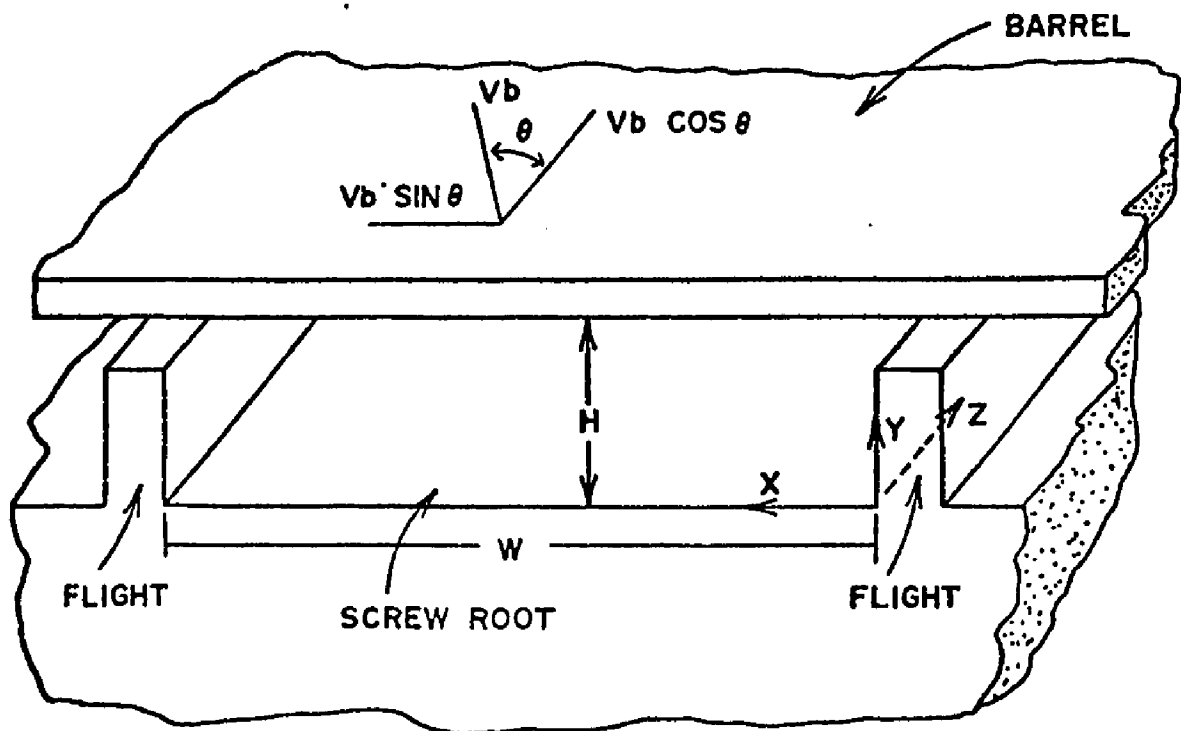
Unwound Channel of a Single Screw Extruder
